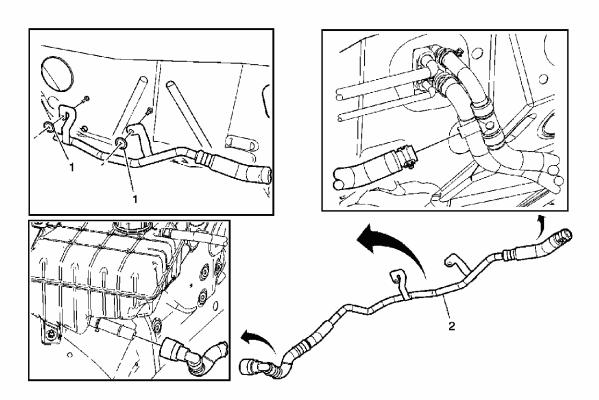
View Of Surge Tank Outlet Hose/Pipe Courtesy of GENERAL MOTORS CORP.
